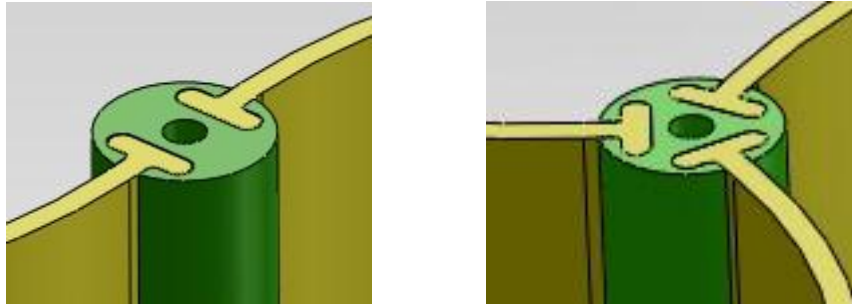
Close-up view of the assembly blade and axis assembly.
